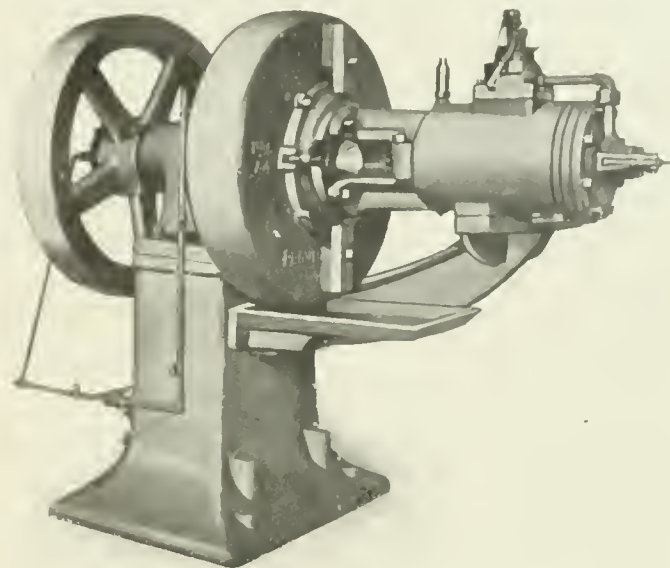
Langelier No. 5A4 Swaging Machine, with Pneumatic Holder in Position for Use
